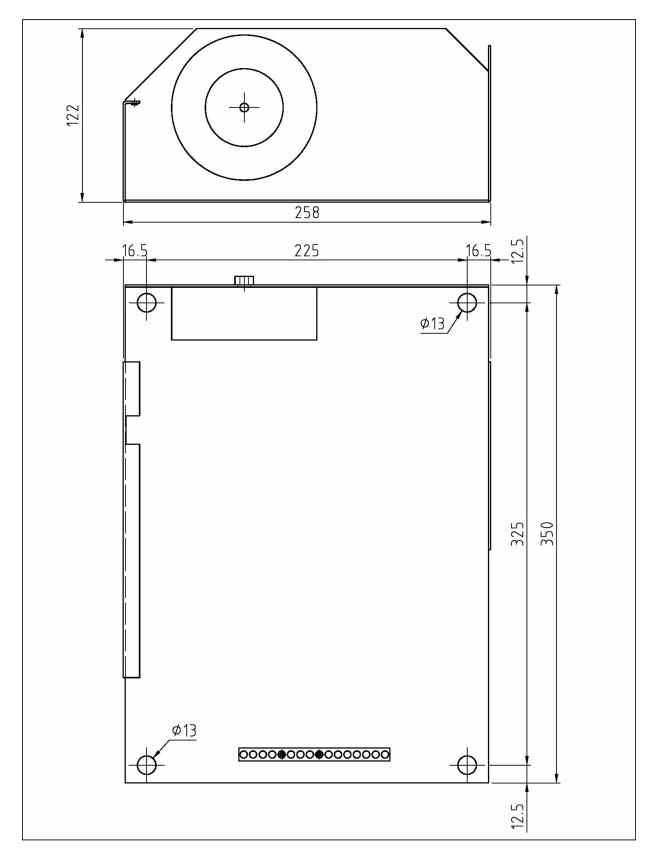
Dimensional diagram LT2 on mounting plate
